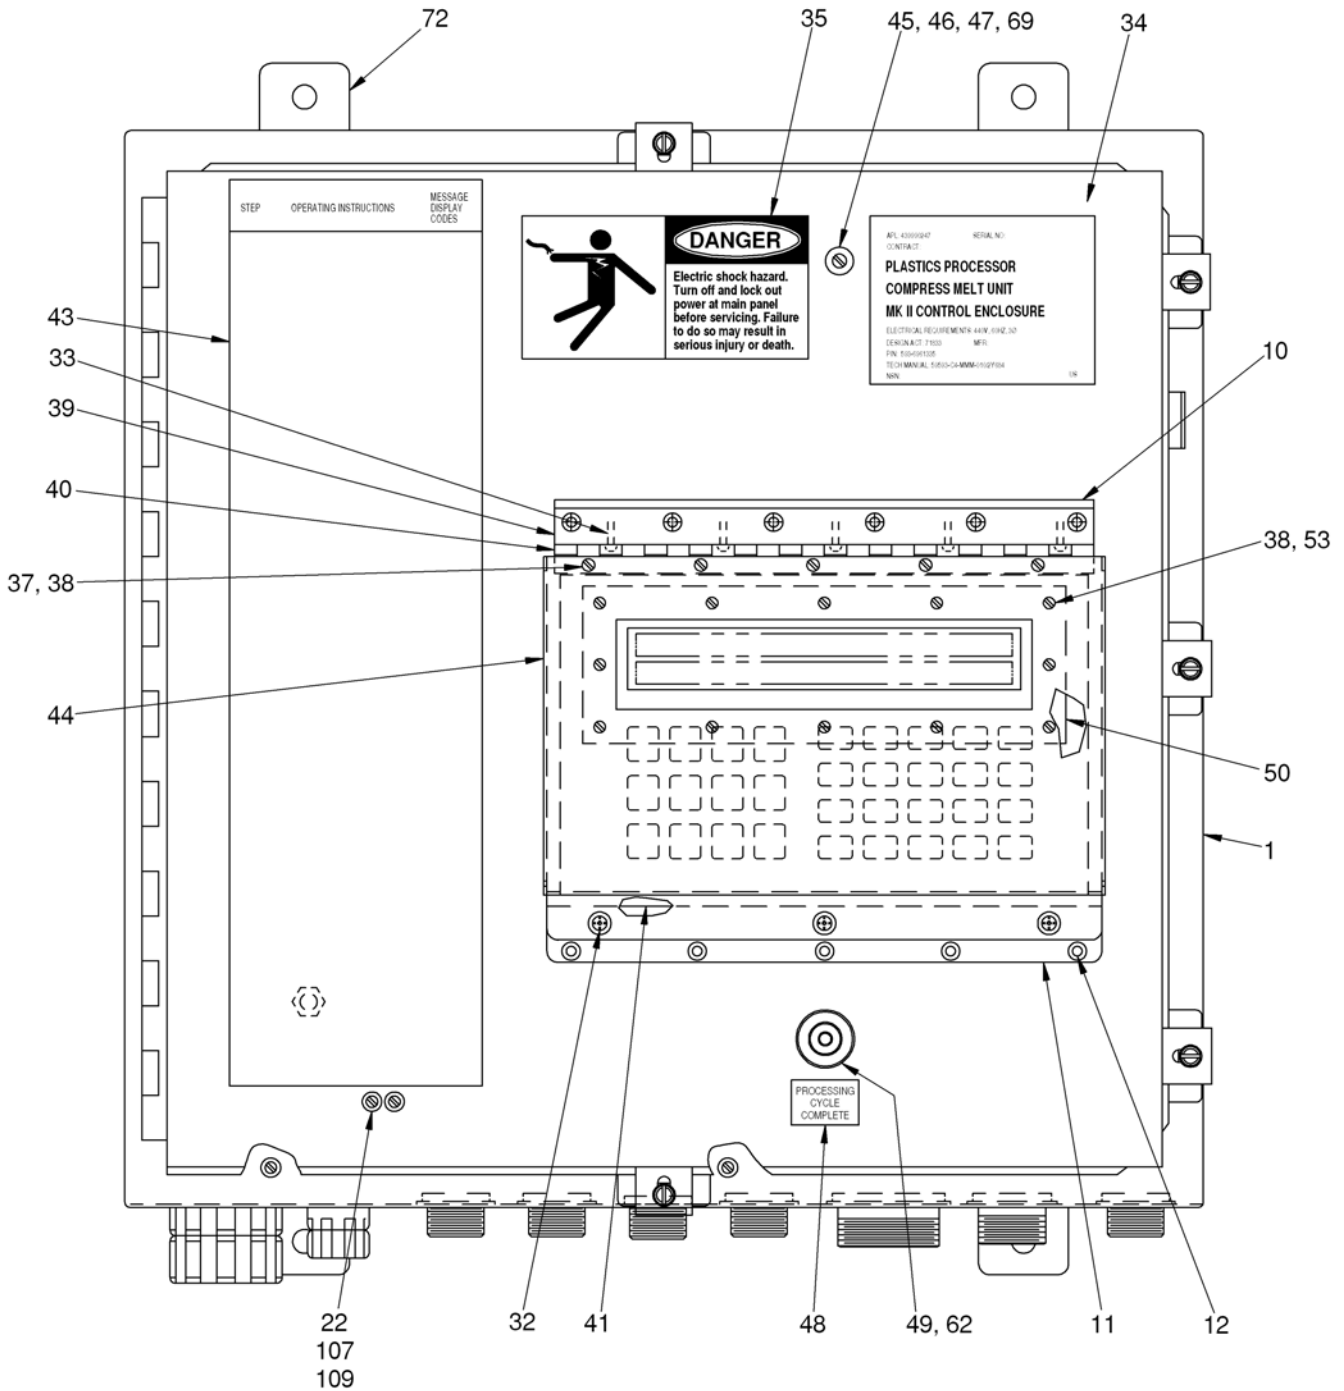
CMU Rear Electrical Enclosure Assembly (sheet 1 of 3)
